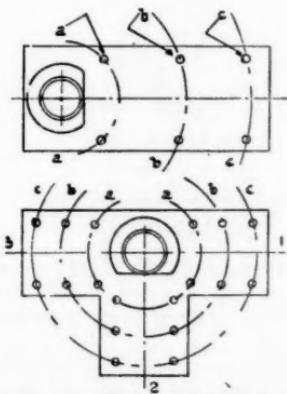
Checking parallelism of whole range of saddle movement with base plate.
